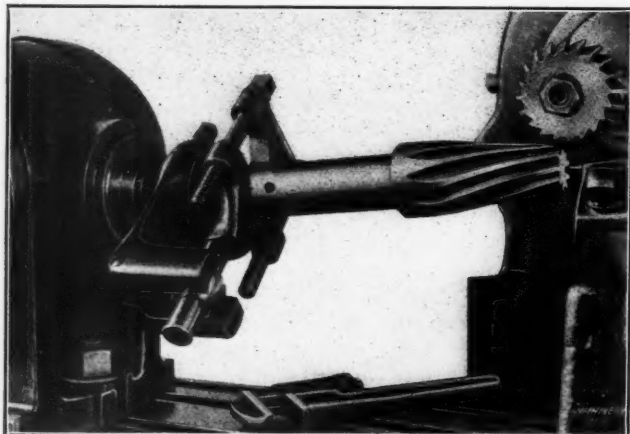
Ready Tool Co.'s Milling Machine Dog
